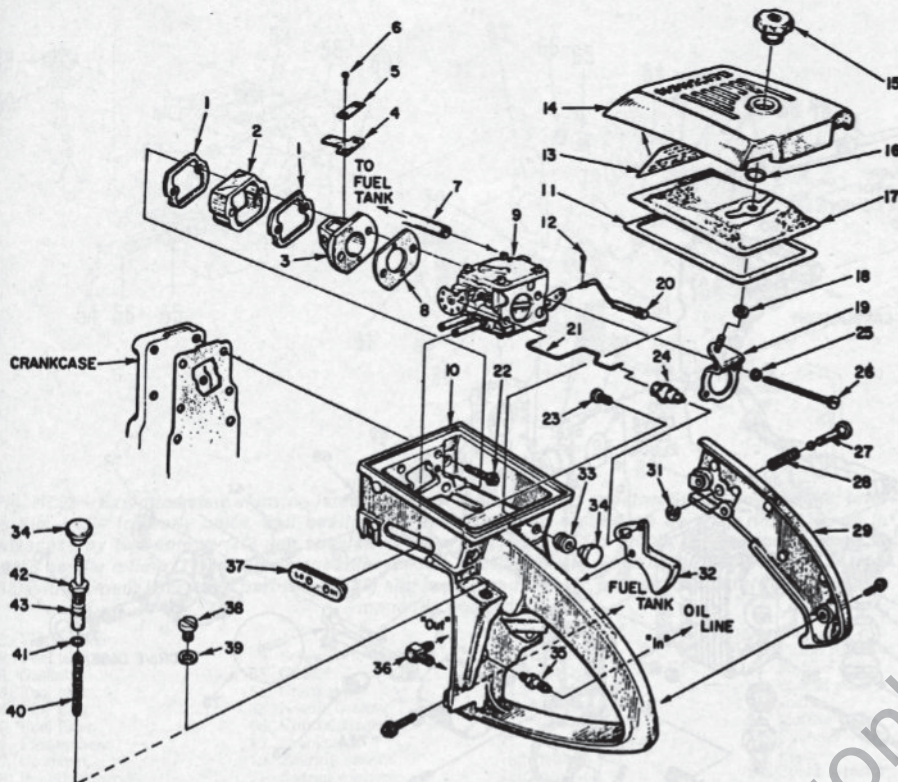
Exploded view of air box and throttle handle assembly for models equipped with pyramid reed type intake valve. Idle speed adjusting screw (23) on some models, is located in air box instead of on carburetor body; remove idle speed adjusting screw and spring from new service carburetor before installing carburetor on these models. Early type aluminum reed seat is shown; refer to Fig. HL32 for late type plastic (Delrin) seat and moulded reed retainer.
